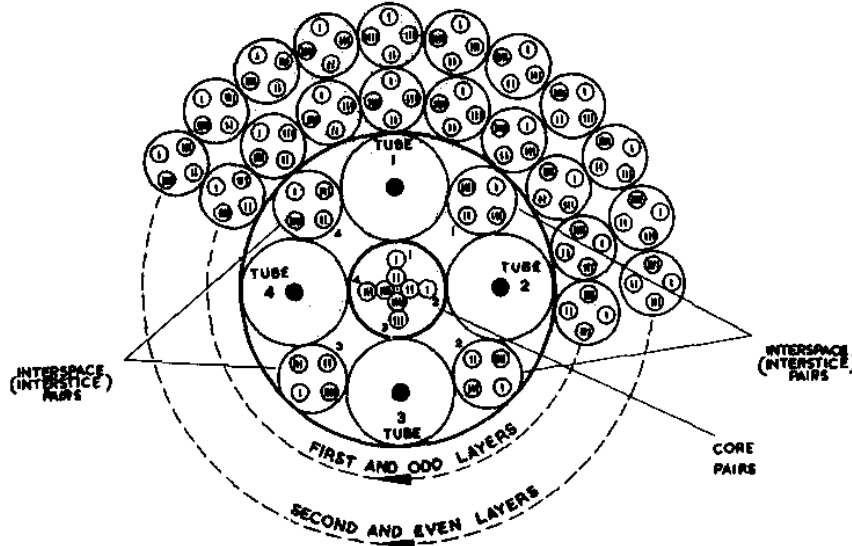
MAKE UP OF 4 TUBE COAXIAL CABLE.
